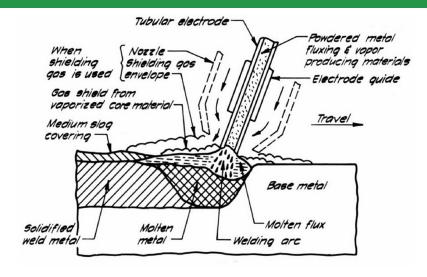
Flux Cored Arc Welding (FCAW).
